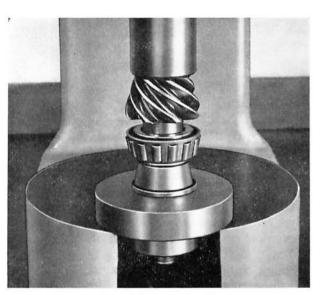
Pressing the pinion rear bearing inner race on to the pinion shaft
